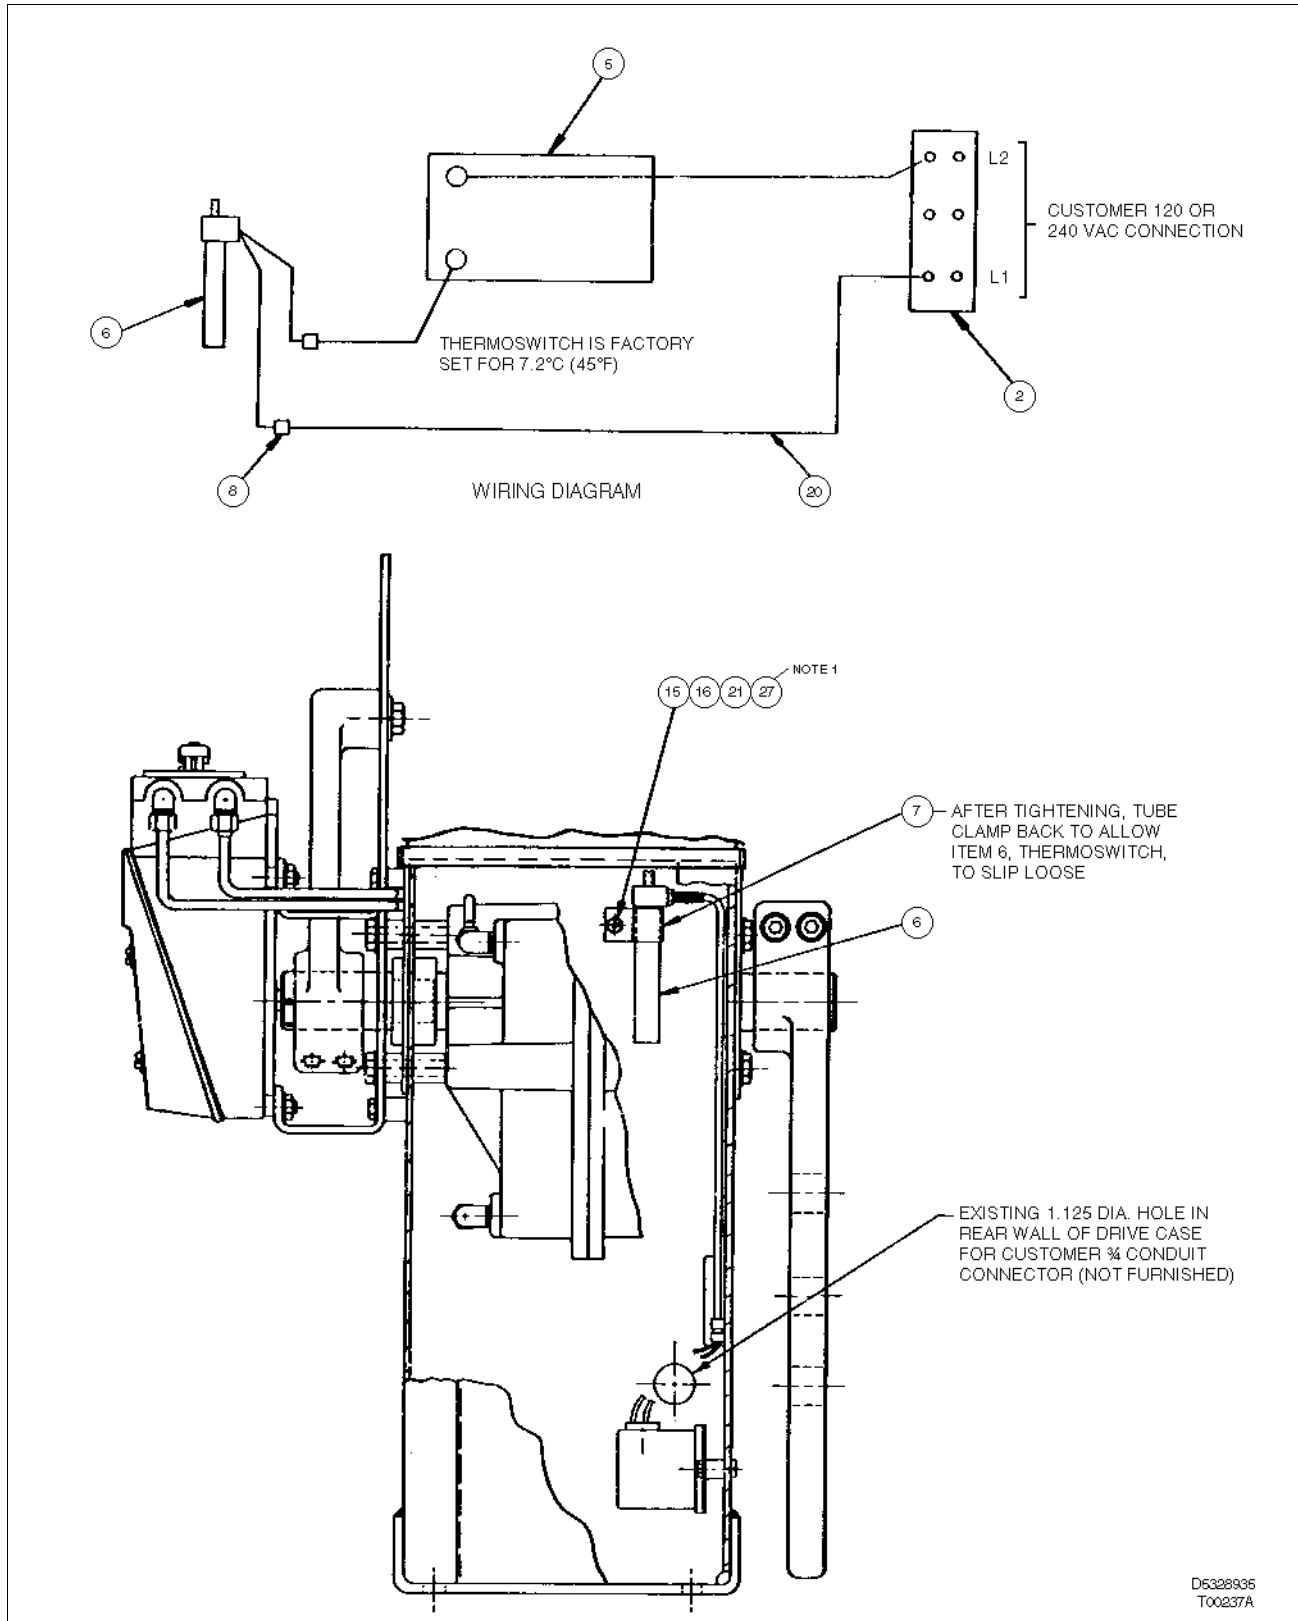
UP2 with Heater, Table A-19 (Sheet 2 of 2)
